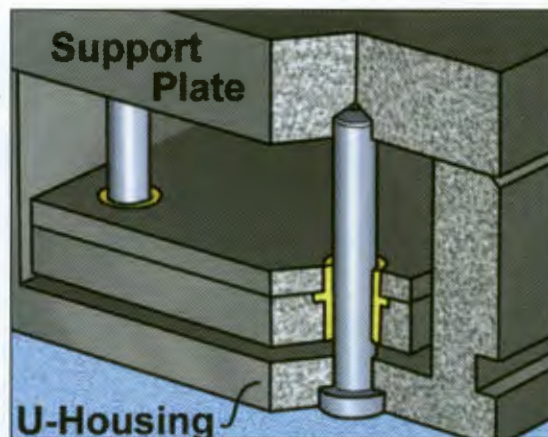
Illustration D: Four aluminum bronze bushings with mid-bushing flange used to guide ejector system.
